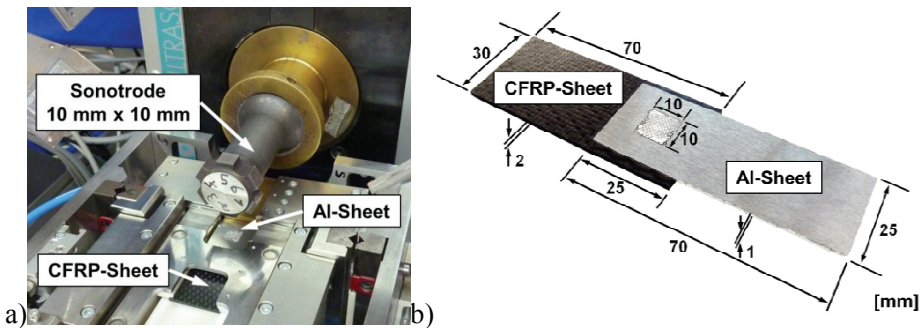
a) Advanced ultrasonic spot welding system (WKK), b) specimen geometry of Al/CFRP-joints
